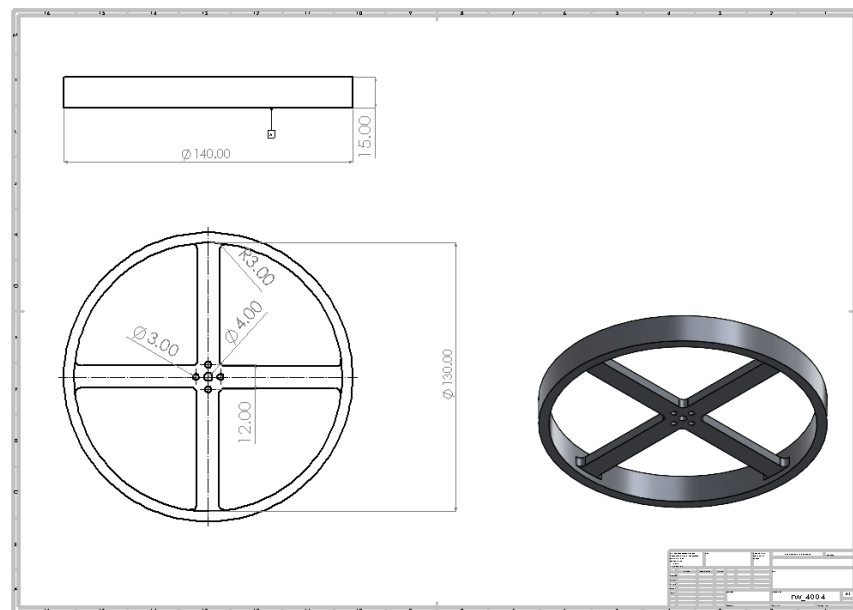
Reaction Wheel GD&T Drawing
